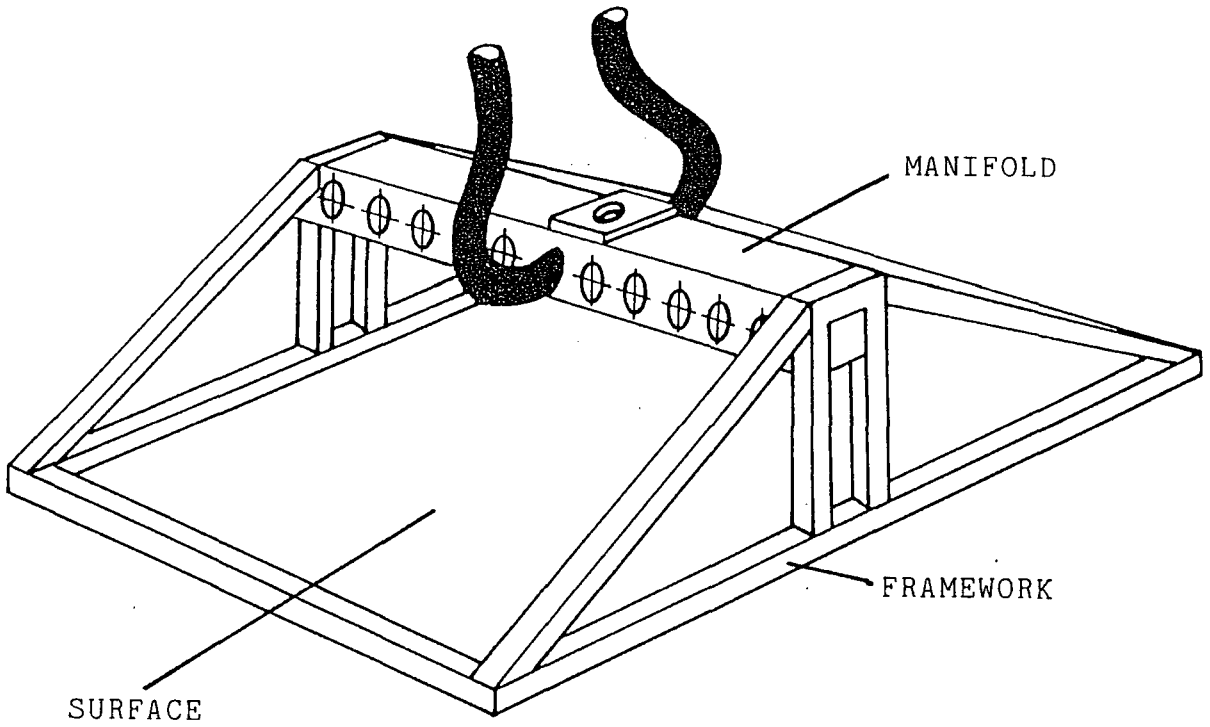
Half Size Flat Gripper: Surface, Framework and Manifold
